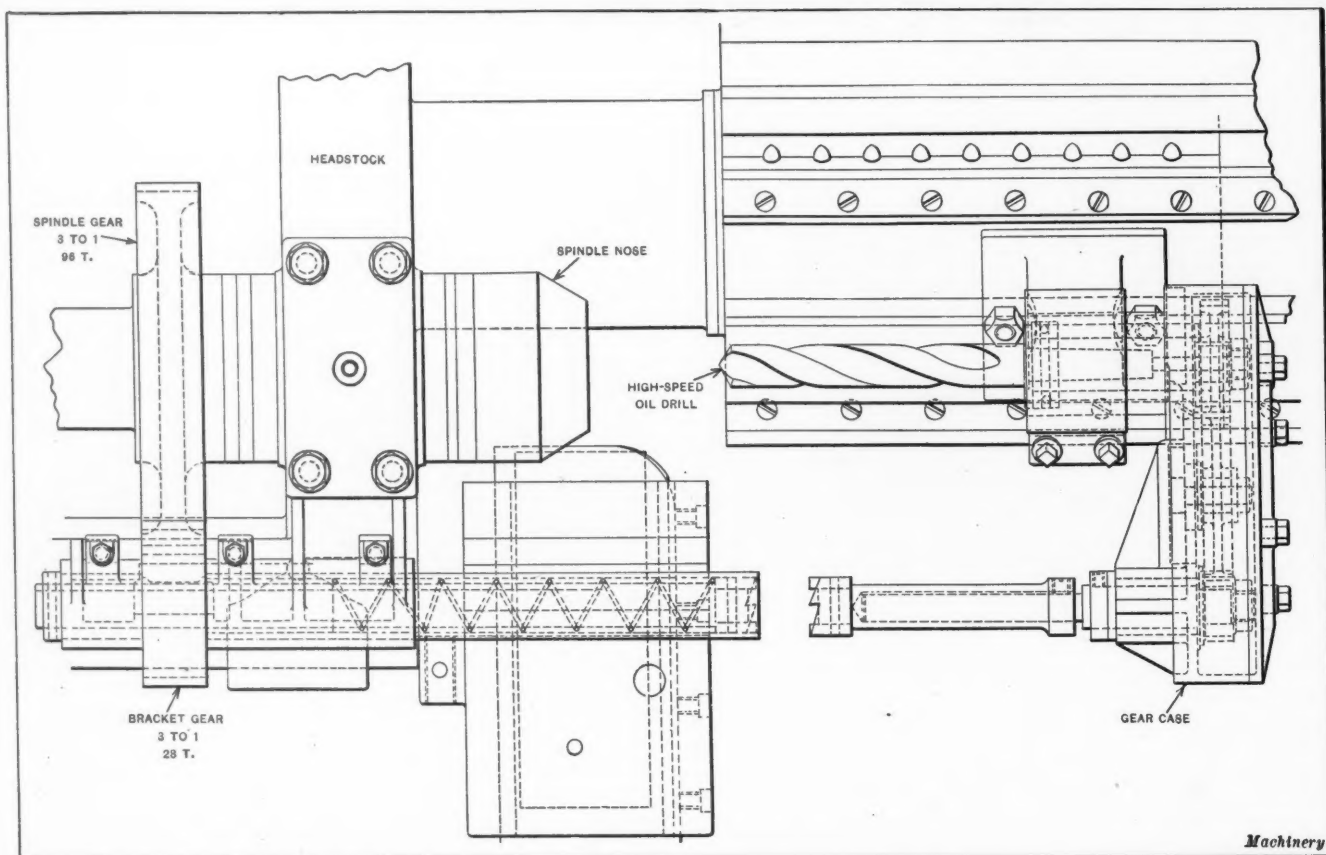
Detail View of High-speed Drilling Attachment shown in Fig. 23
